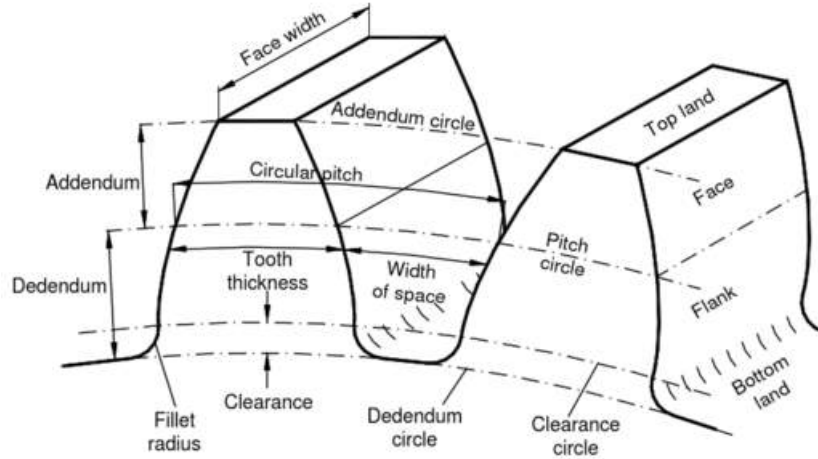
Schematic diagram of spur gear showing the main gear geometry. Source: [62].
